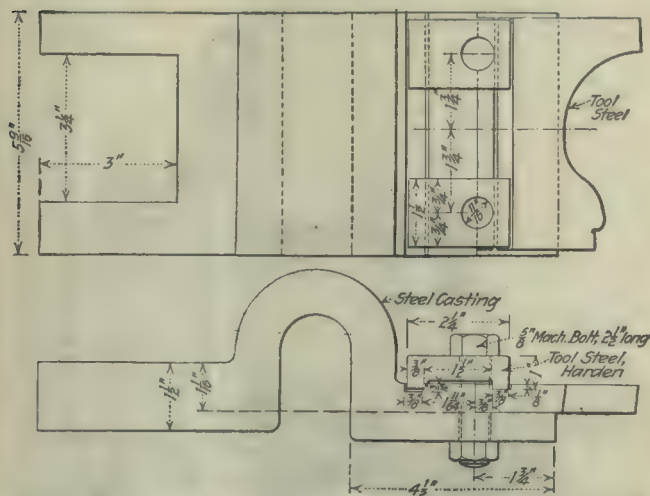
GOOSE-NECK TOOLHOLDER USED ON BORING MILL
